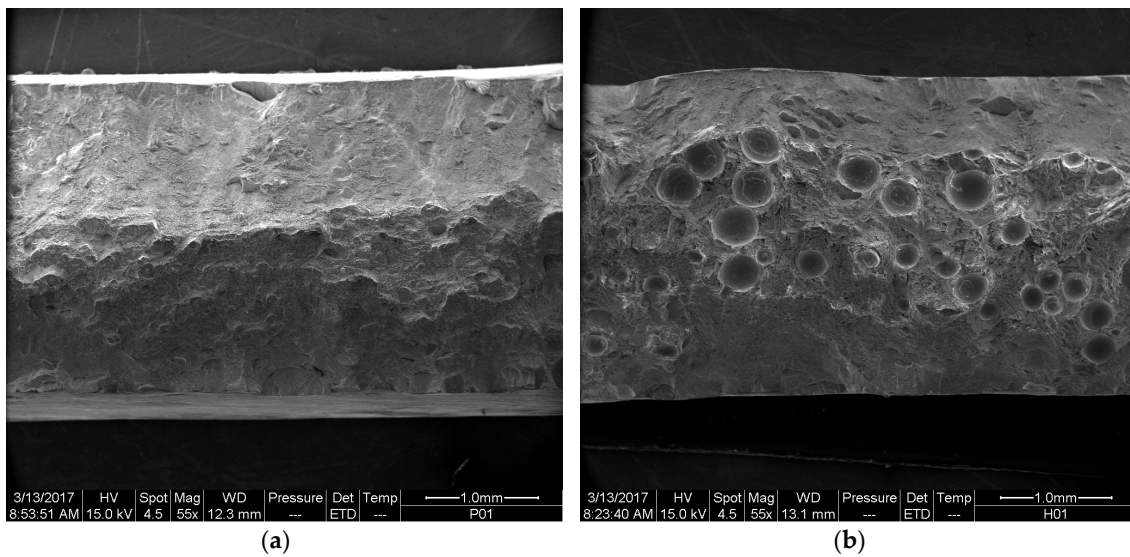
Fractographs of the horizontal weld (a) and the flat weld (b) made with higher heat input (2.2 kW, 8 mm/s).
